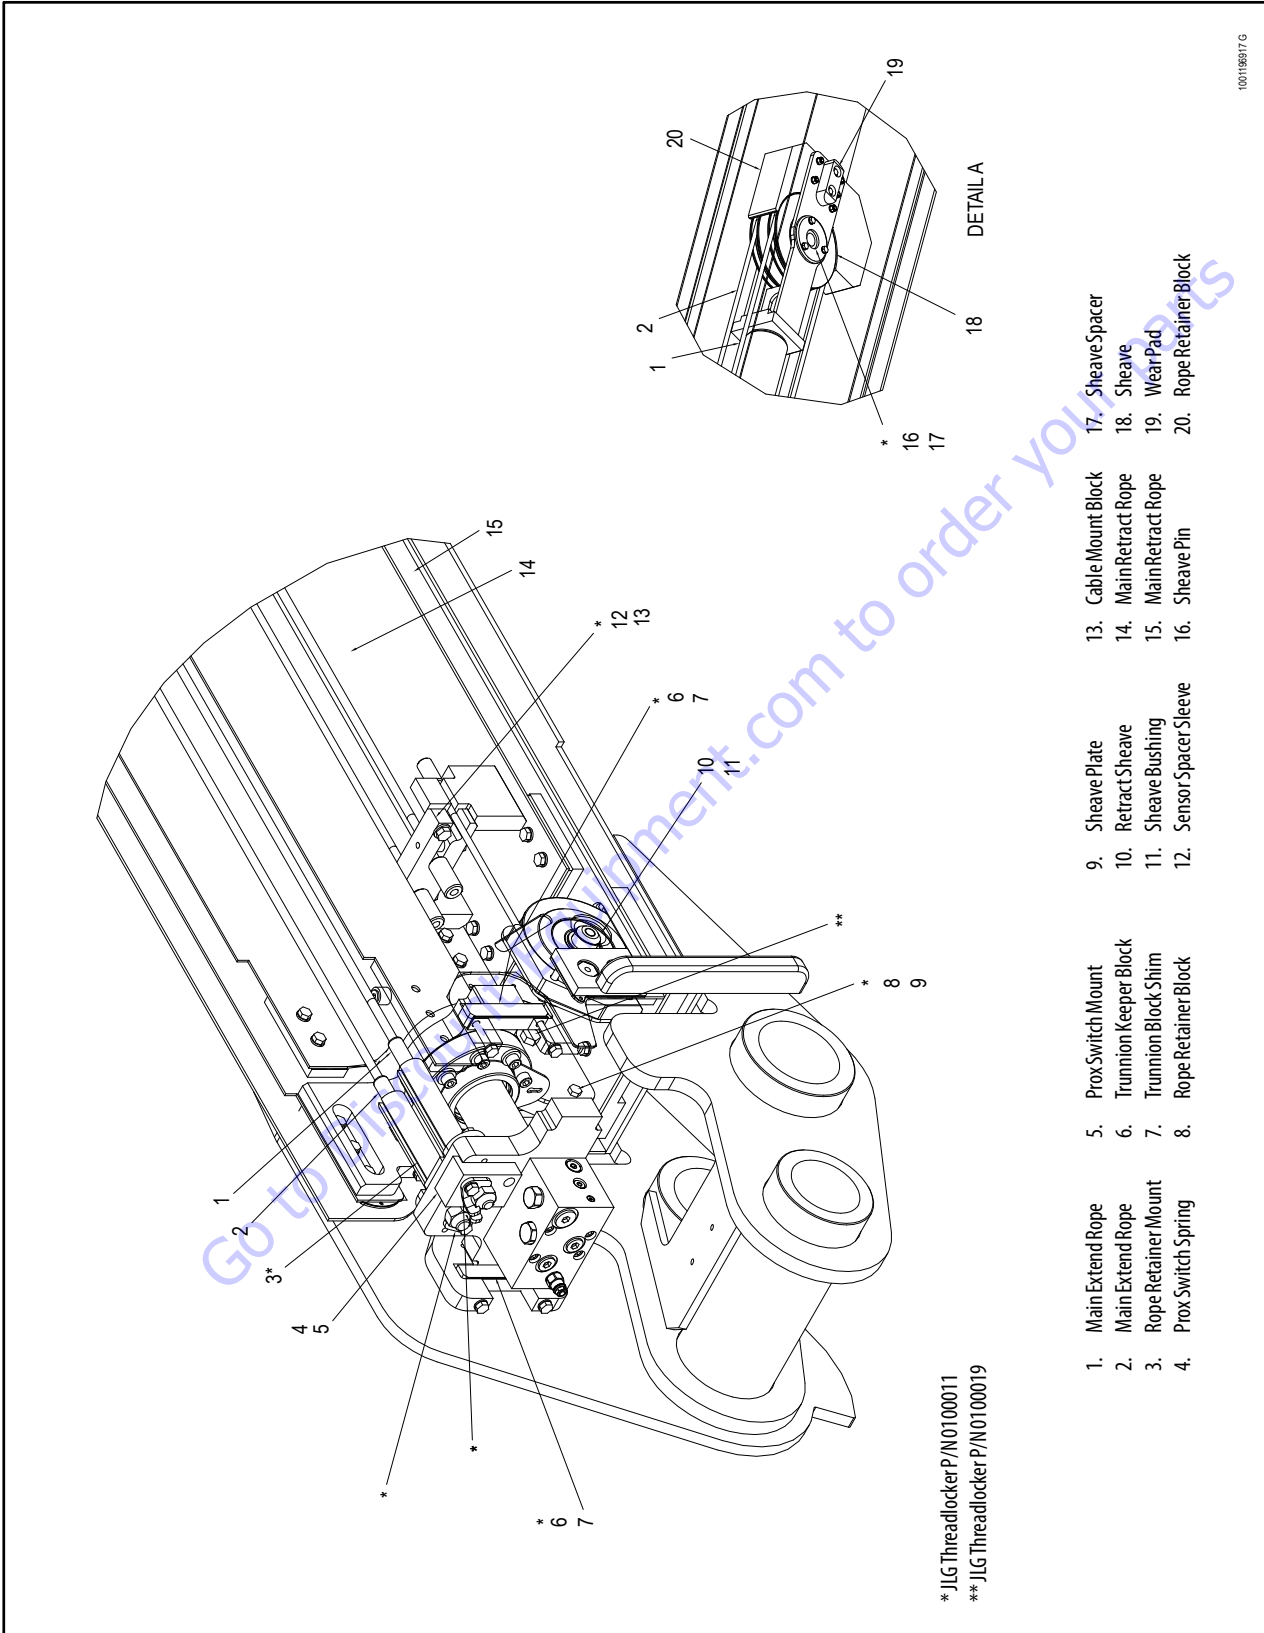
Main Boom Assembly - Sheet 1 of 7
